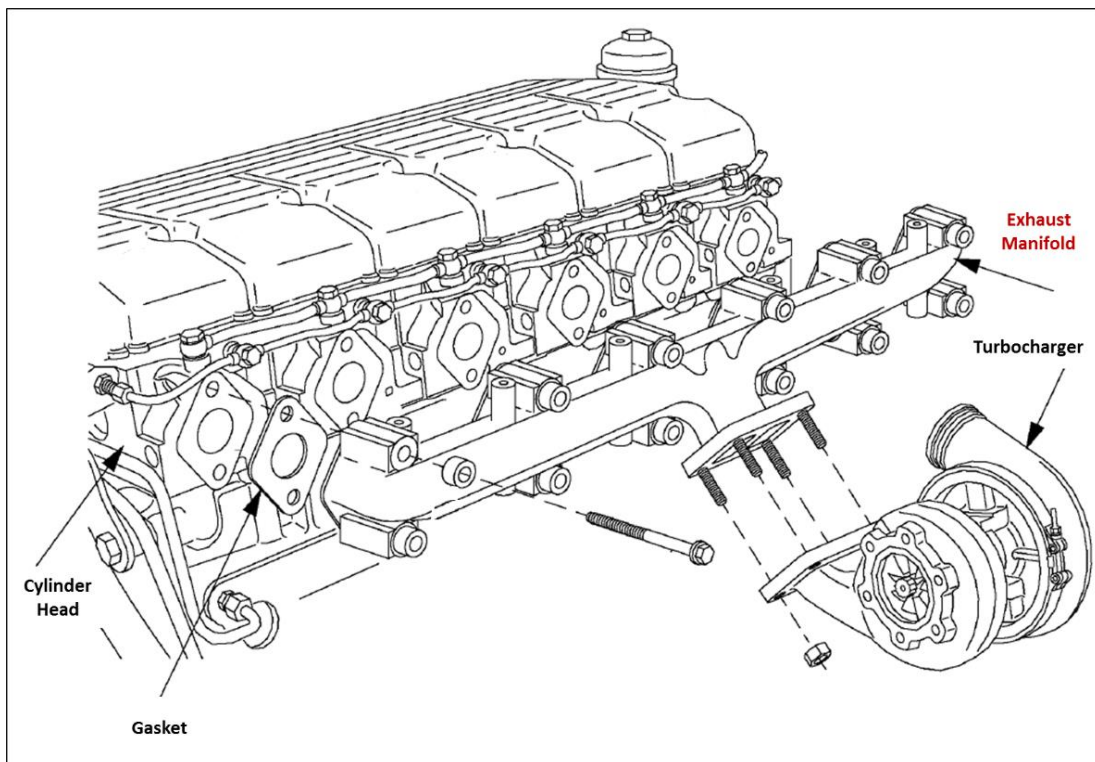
Engine Exhaust Manifold Schematic View [1]
